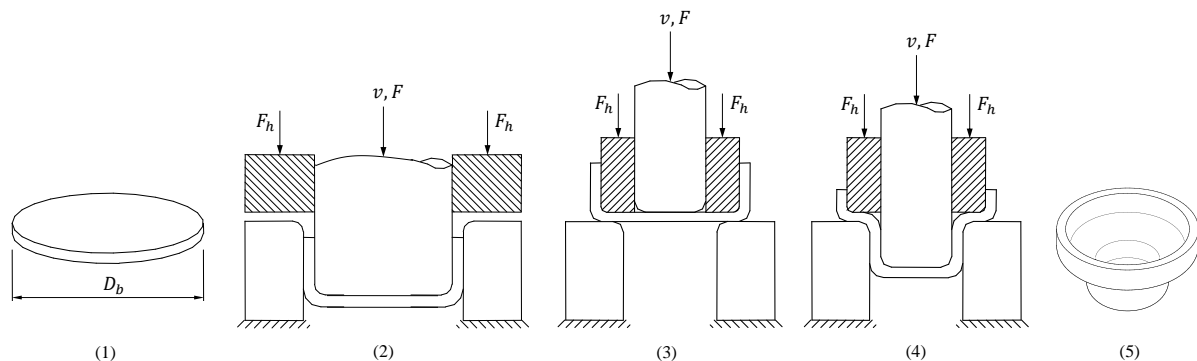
Schematic drawing of multi-pass stamping forming: (1) workpiece, (2) drawing, (3) redrawing beginning, (4) redrawing end and (5) final piece. Where D_b is workpiece diameter, v is the drawing speed, F is the drawing force and F_h is the blank-holder force.
